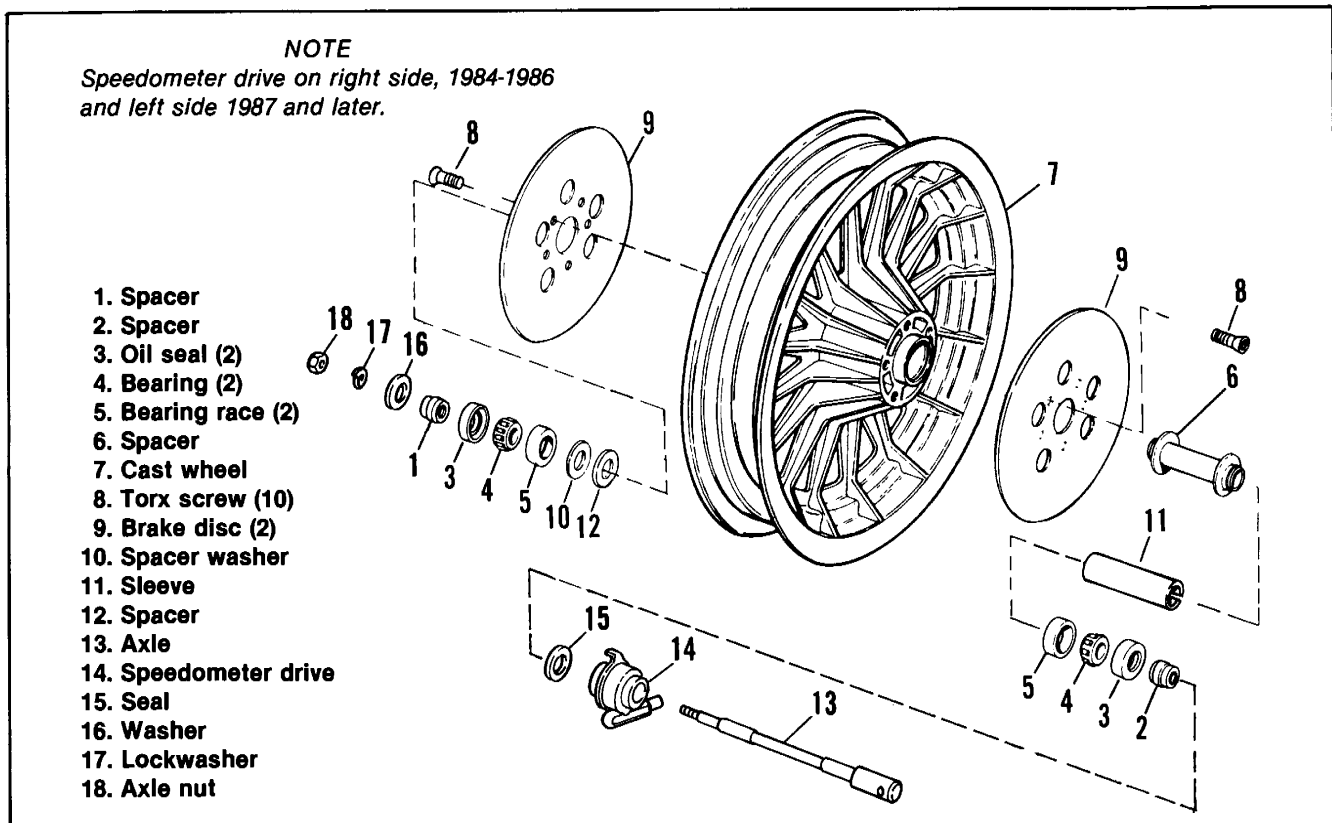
Cast Front Wheel Exploded View — FLT Models
